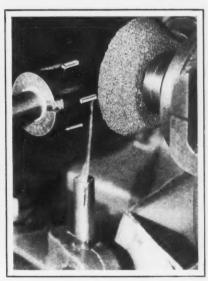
Grinding an End-mill with Carboloy Inserts in a Cutter Grinder
